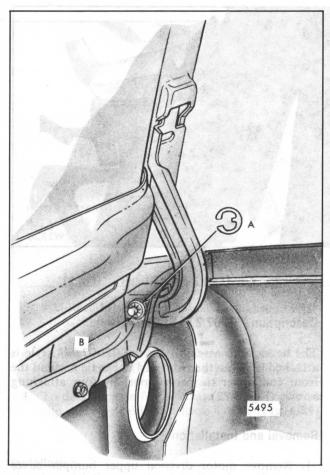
Hood Hinge - "H-11, 15 and 77"
